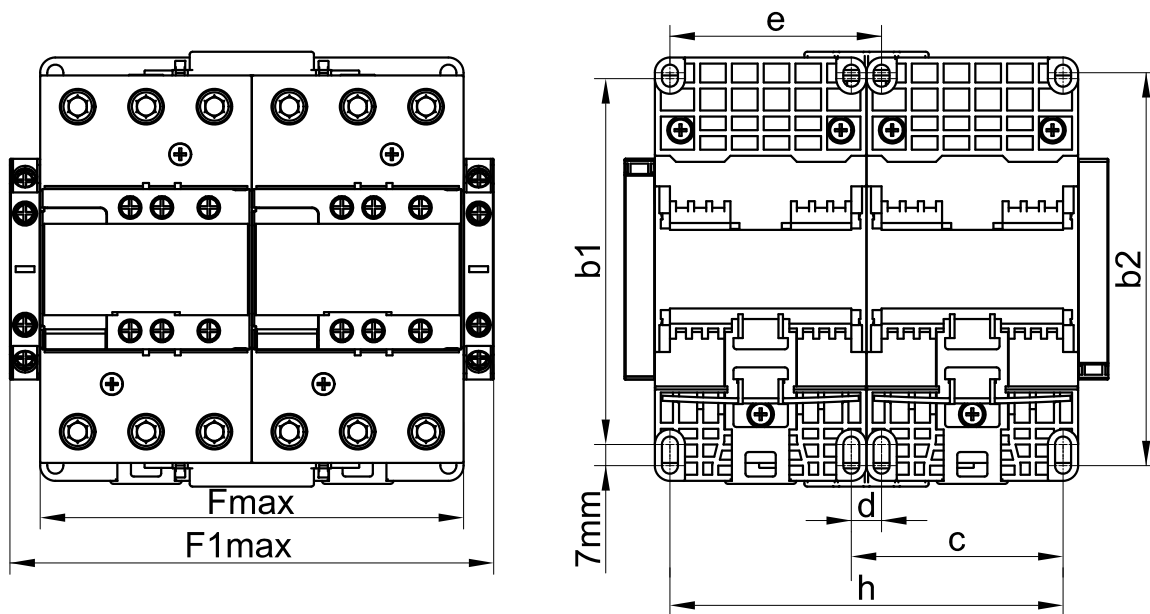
HDCX-80~95 reversible contactor overall installation dimension
